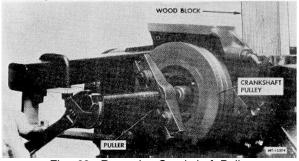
Removing Crankshaft Pulley 57. If front seal wear sleeve on crankshaft pulley shows evidence of wear or damage, remove sleeve. This can be accomplished by placing crankshaft pulley in press and with an adapter (1-3/4" I.D. $\times 2$ -1/4" O.D. $\times 3$ " long), press the pulley from the wear sleeve. Be careful not to damage pulley hub surface when performing pressing operation.
